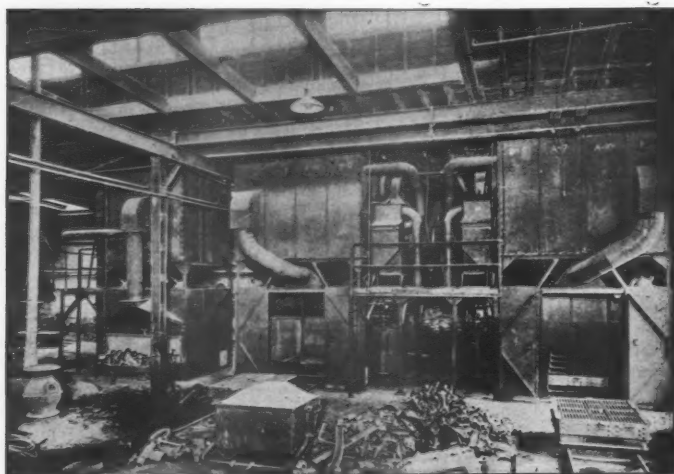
SAND-BLAST ROOM INSTALLATIONS EQUIPPED WITH TABLE AND CARS FOR HANDLING WORK
